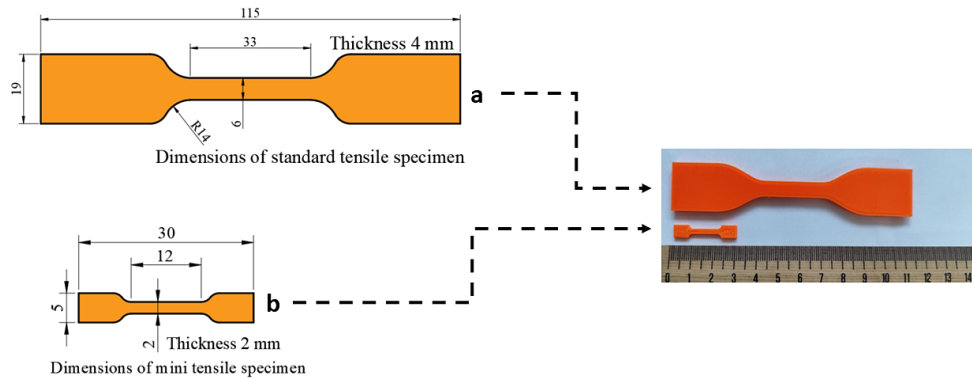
a) Dimensions of standard tensile specimens, b) Dimensions of mini tensile specimens
